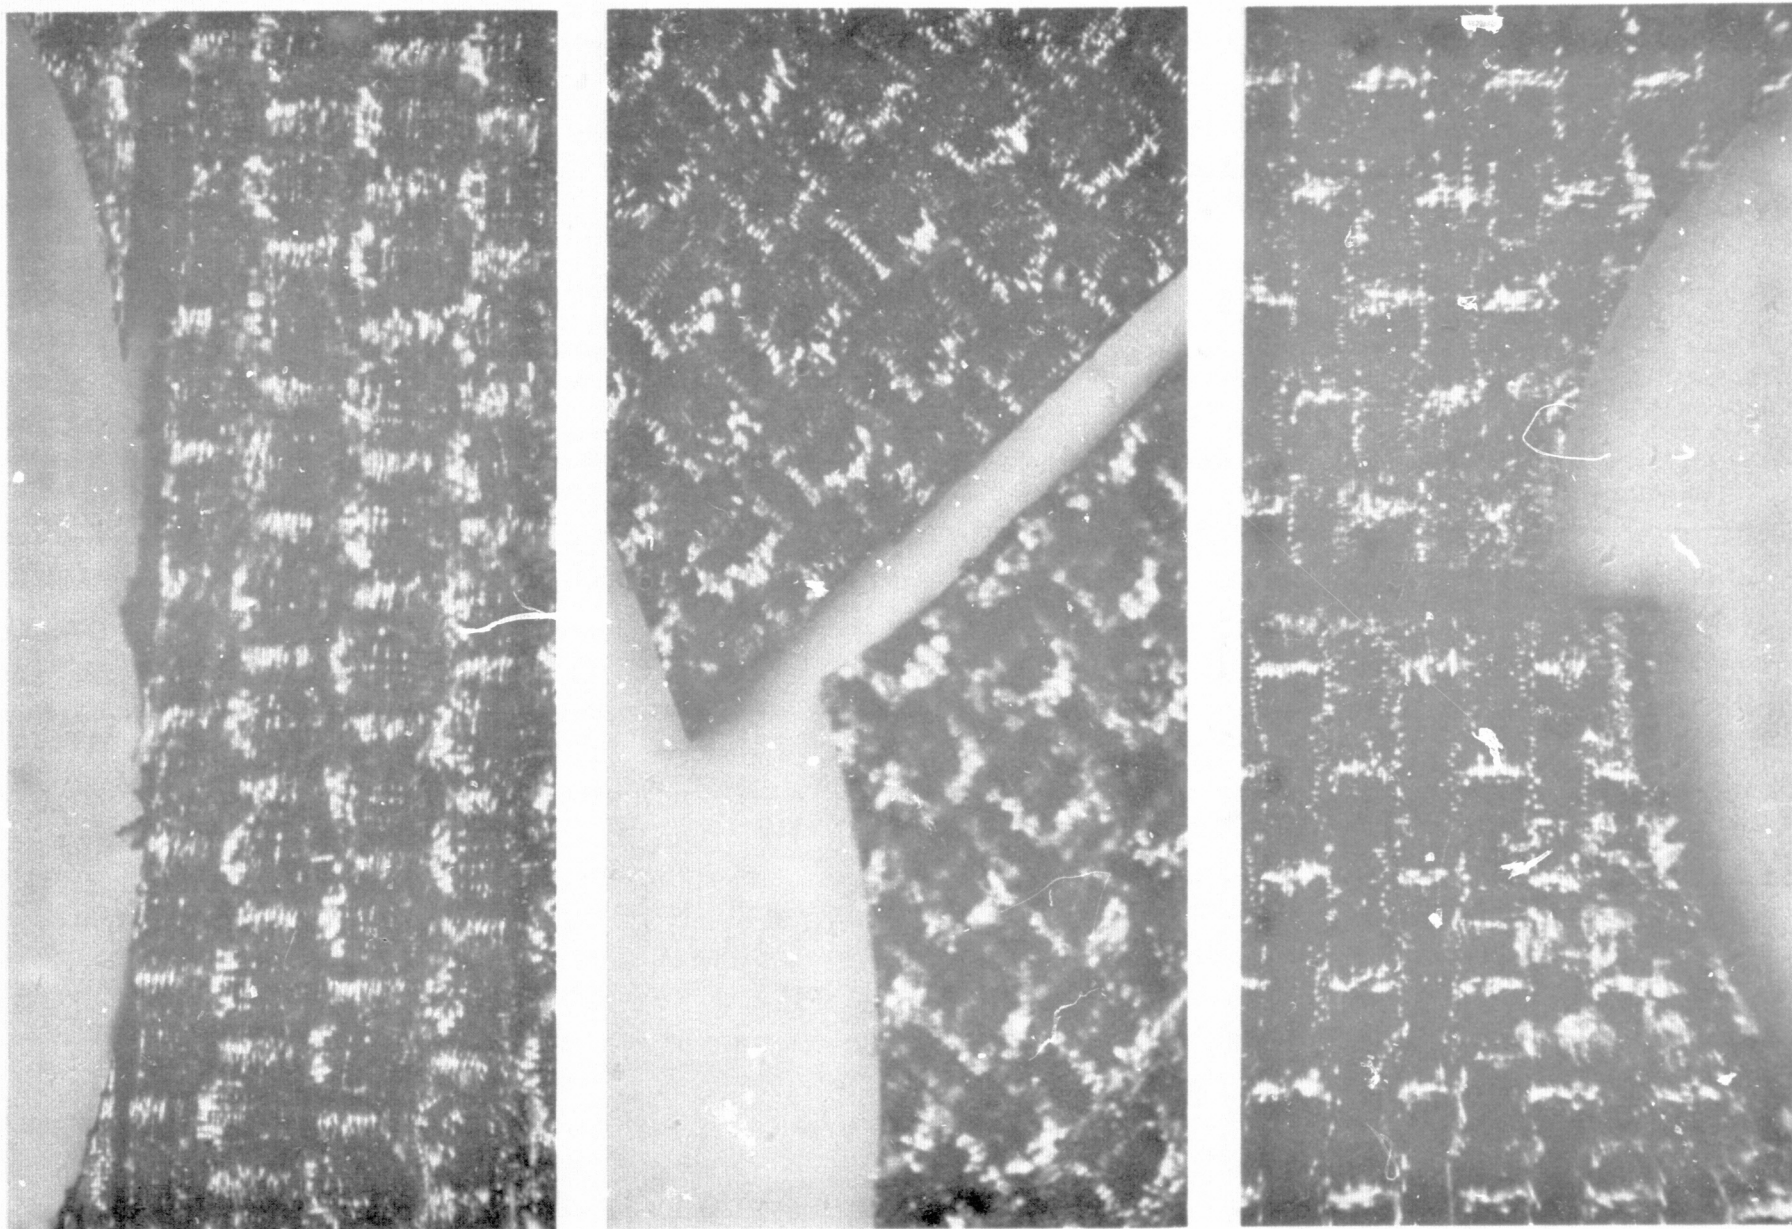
Fracture Planes for Specimen Containing a Circular Hole.
